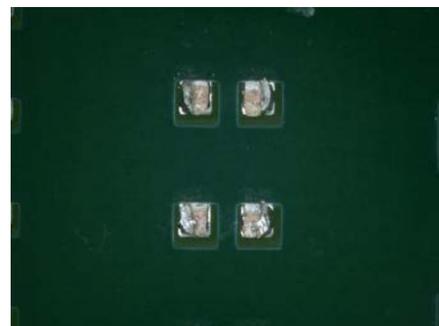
Underneath 0402 Component After Cleaning using DI-water
